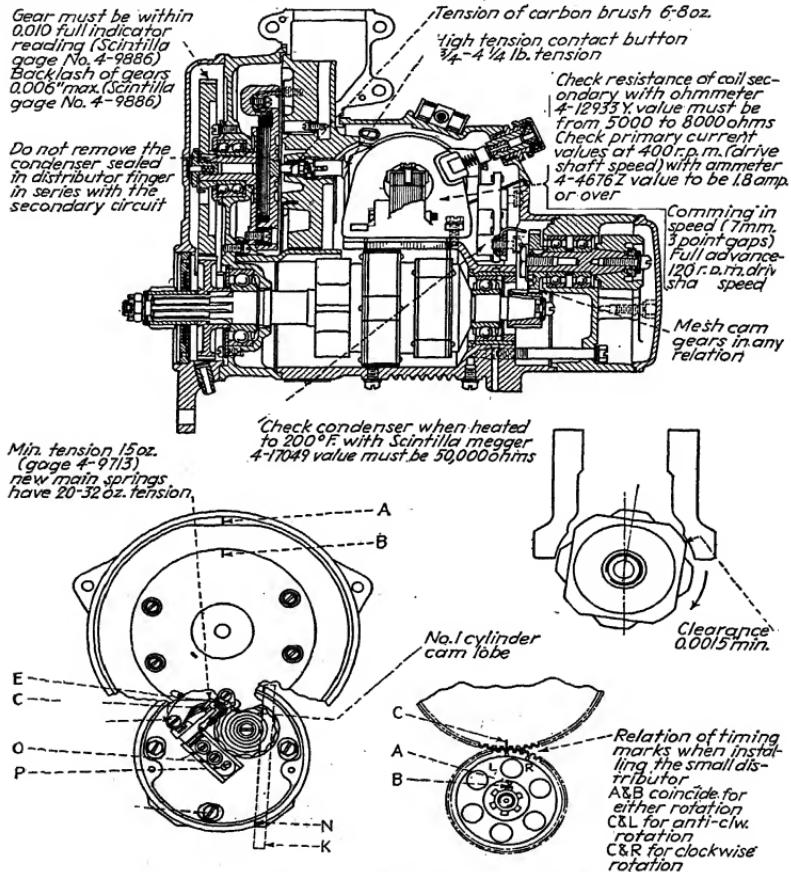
Details of Scintilla magneto shown in Fig. 6.
